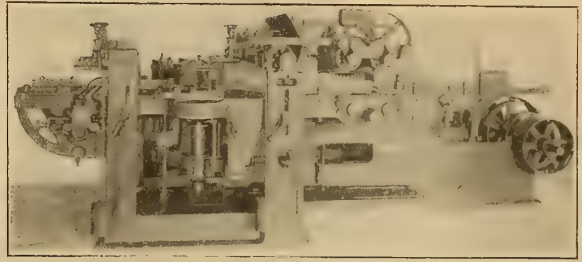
STRAIGHT MOULDER. No. 128. S. A. WOODS MACHINE CO.
